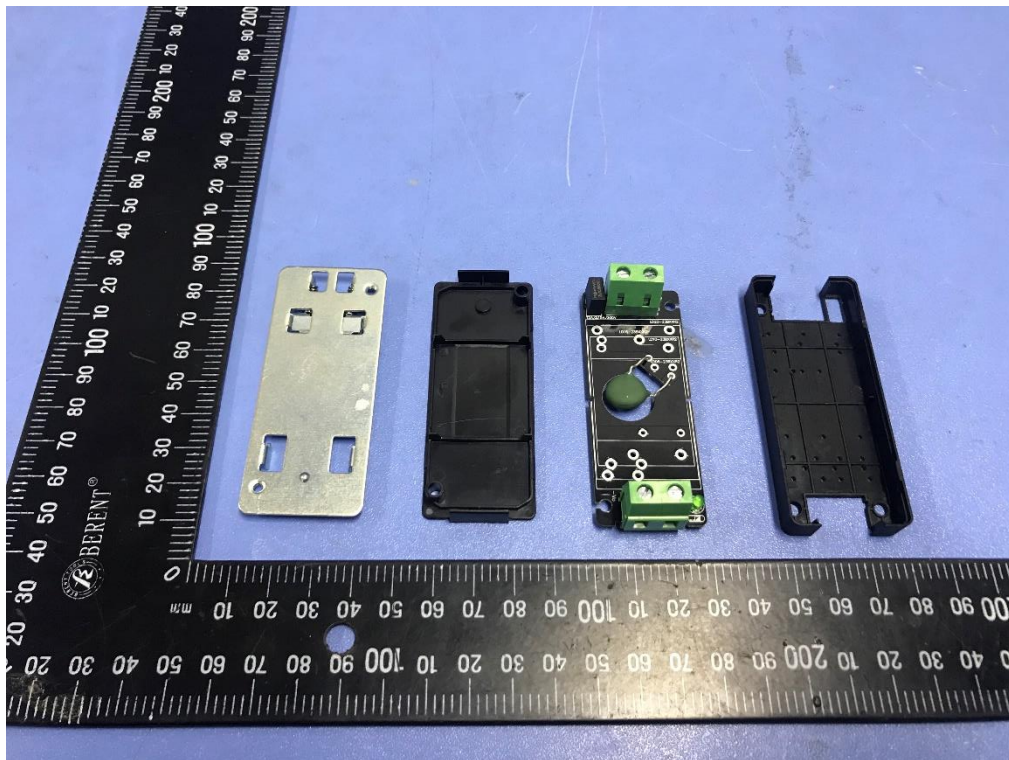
Internal view 2 (chassis and DIN-Rail mounting for the models suffix is A2S & A4S)
